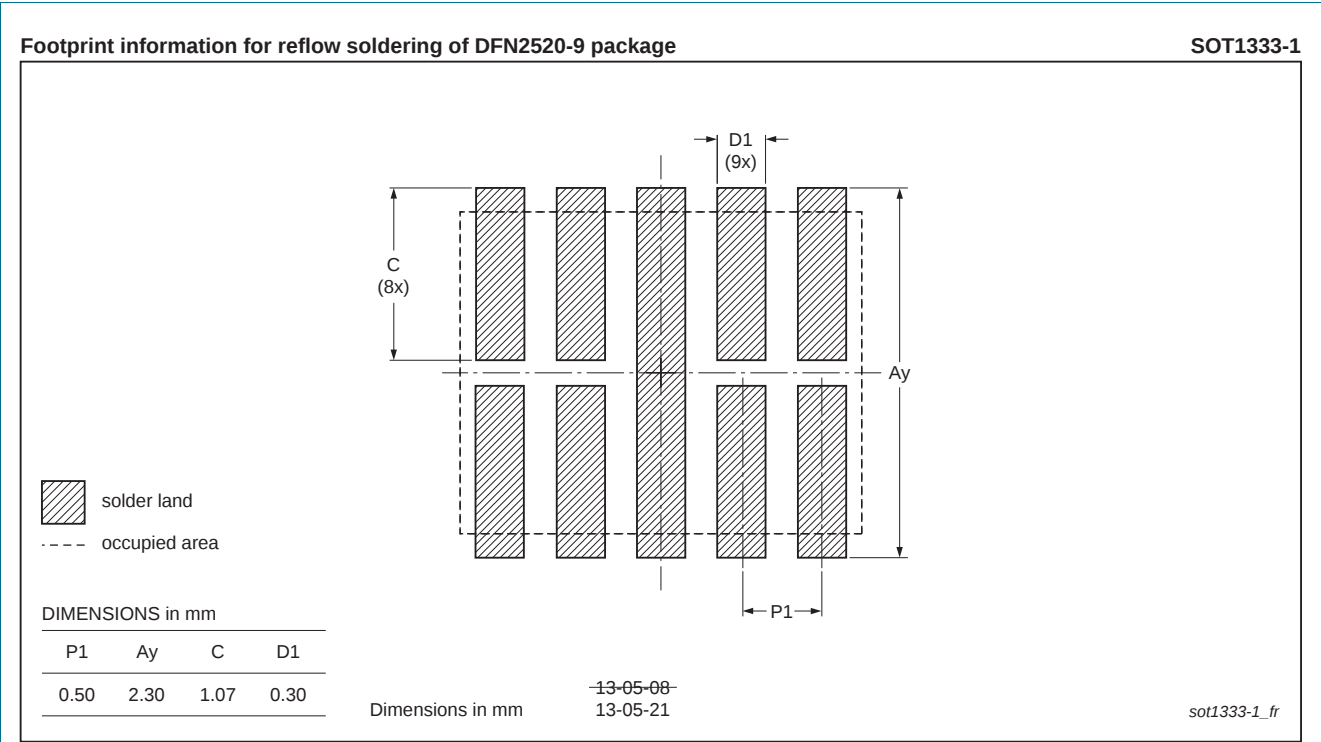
Reflow soldering footprint DFN2520-9 (SOT1333-1)
